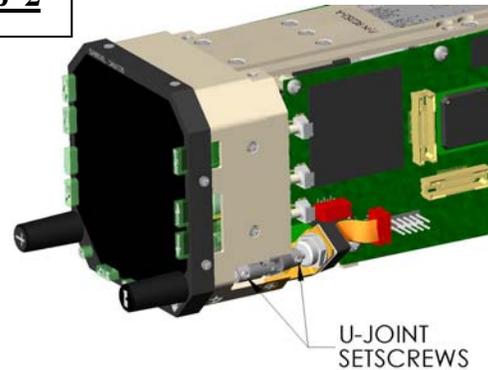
Rotate Heading and Course knobs to expose U-Joint retaining setscrews. Using 0.050" hex wrench, loosen U-Joint retaining setscrews. (left and right hand sides are symmetric)
